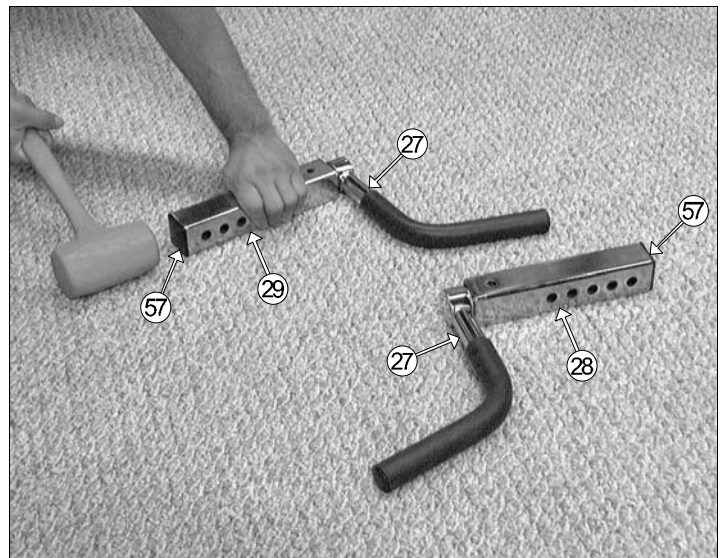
Locate the assembled Press Arm Handles (#27) and, using a rubber mallet, insert two Plastic Insert Caps 1 3/4" Sq. (#57) into the tube-ends of the left and right Handle Housing Tubes (#28, #29).
